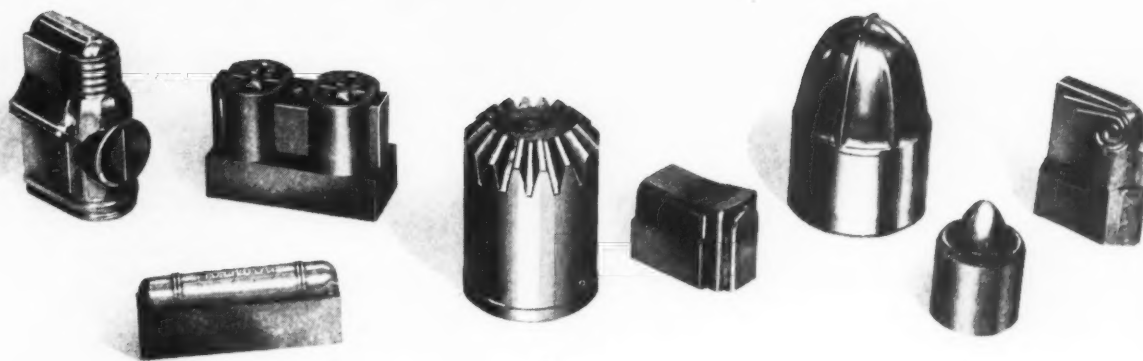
Hobs Used to Form the Mold Cavities for a Variety of Plastic Parts Ranging from a Bevel Gear to Electrical Receptacles
